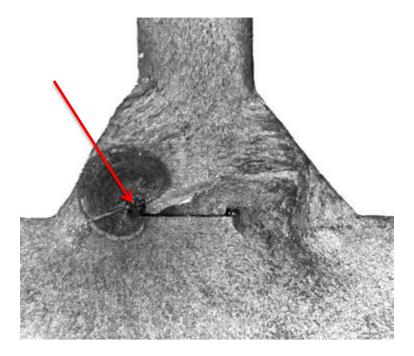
Fracture Surface of I-shaped Cross Section
